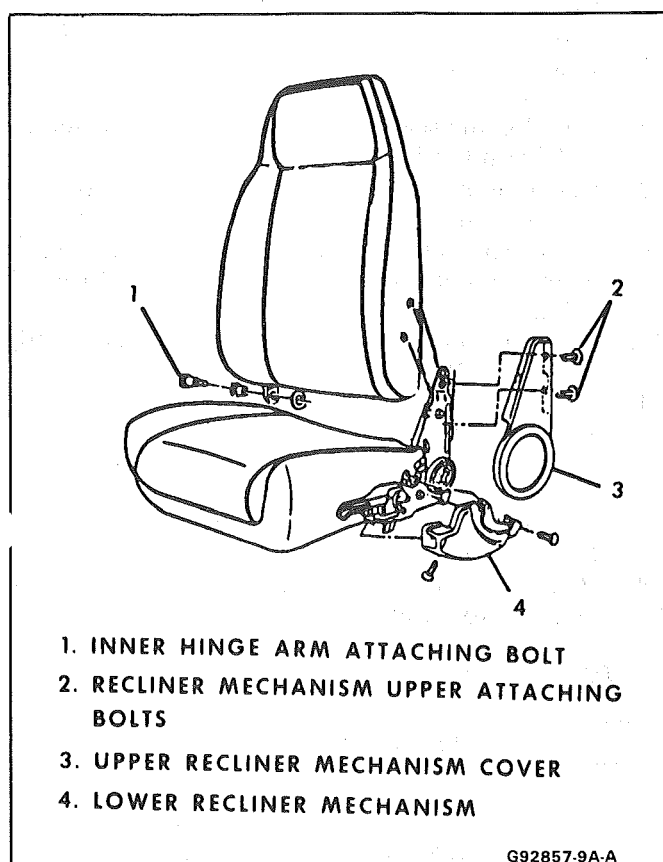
Recliner Mechanism Upper and Lower Escutcheon
